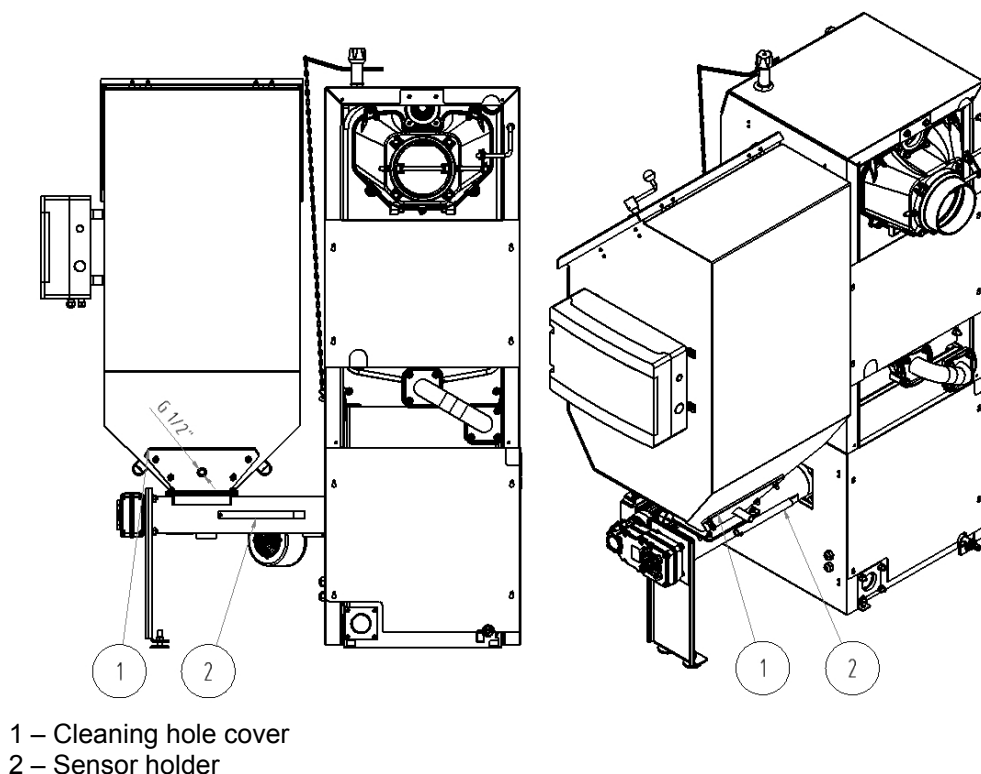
Mounting of emergency fire-extinguishing equipment
